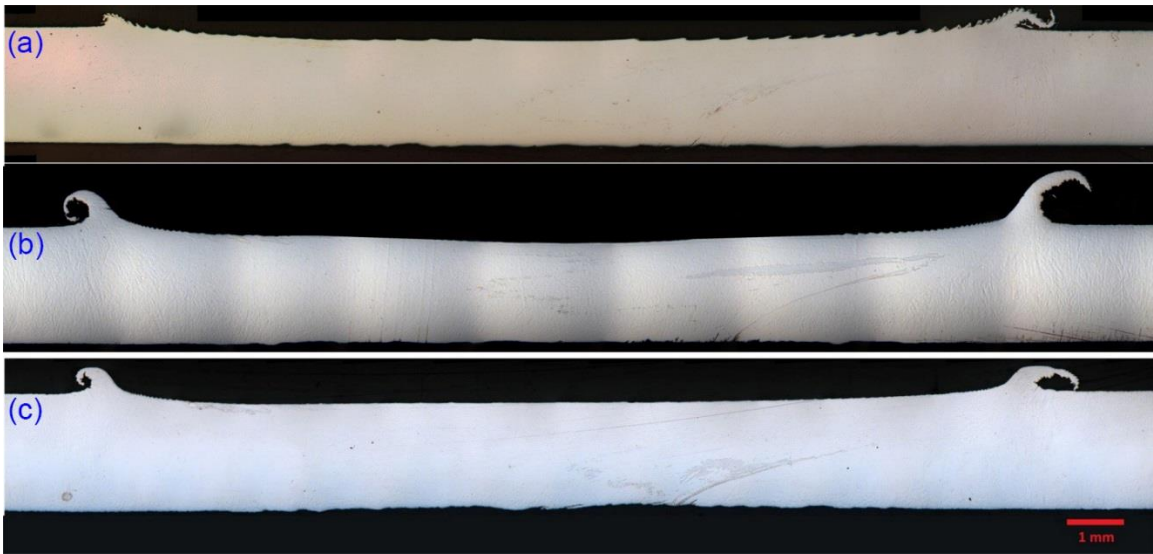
Low-resolution optical microscopy images of weld cross-sections. The welds were conducted at a constant feed rate of 75 mm/min and at an rpm of: (a) 350, (b) 400, and, (c) 450. These images reveal the overall macrostructure of the welds.
